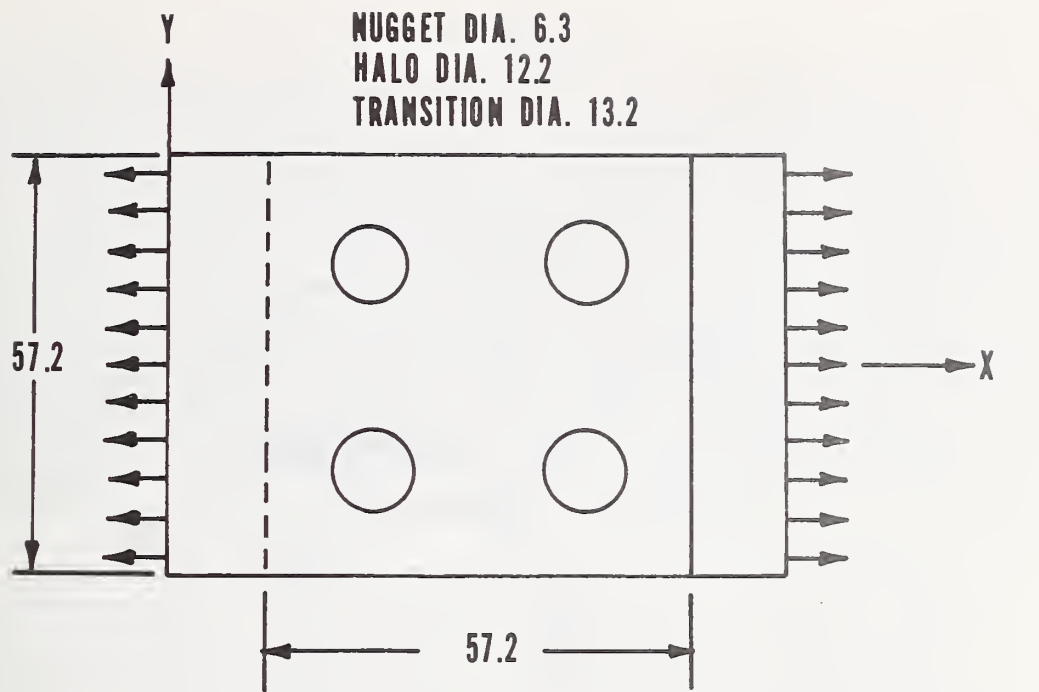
COMPARABLE SINGLE-LAP AND DOUBLE-LAP WELDBONDED JOINTS. DEMINSIONS ARE IN MILLIMETERS (1 in = 25.4 mm).
